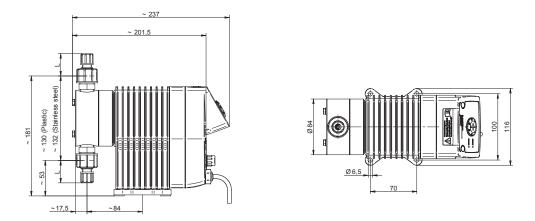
Dimensioned drawing of MEMDOS SMART LB 15, 20 with dosing head made of PVC, PP, PVDF or stainless steel (1.4571) (all dimensions in mm)
